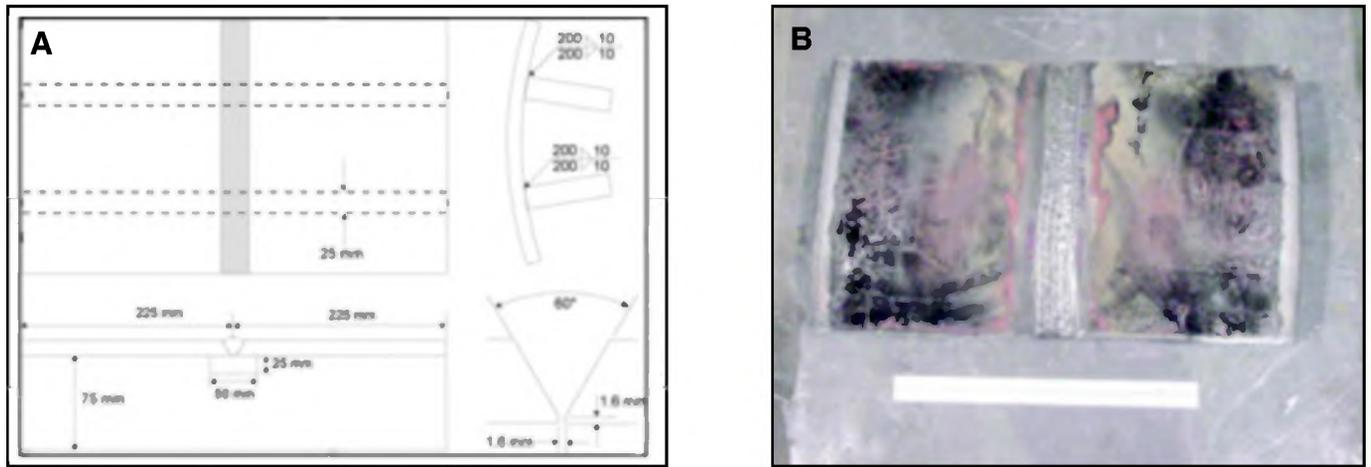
Multipass weld assembly using a section of 36-in.- (914-mm-) diameter X70 pipe. A — Schematic illustration; B — picture.
